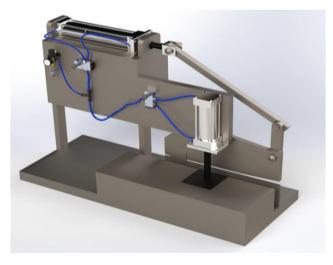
Pneumatic sheet metal clamping and shearing machine model drawing.
